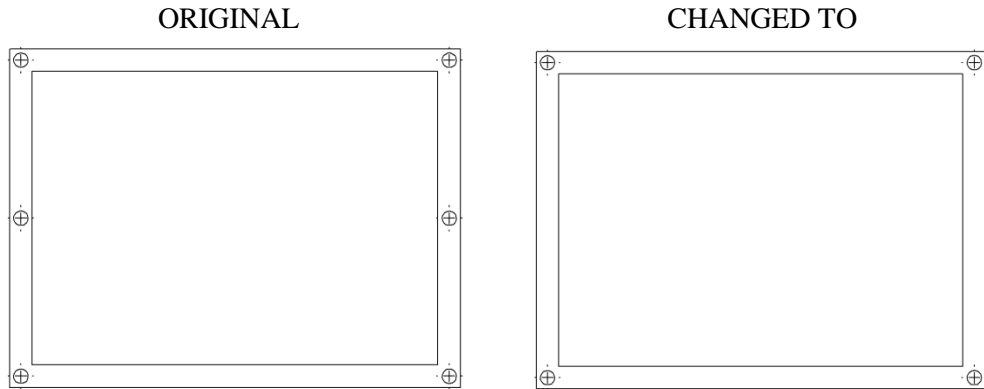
The inner edge was removed from the vacuum plate in order to eliminate interaction with the bead holes in the plate above.
